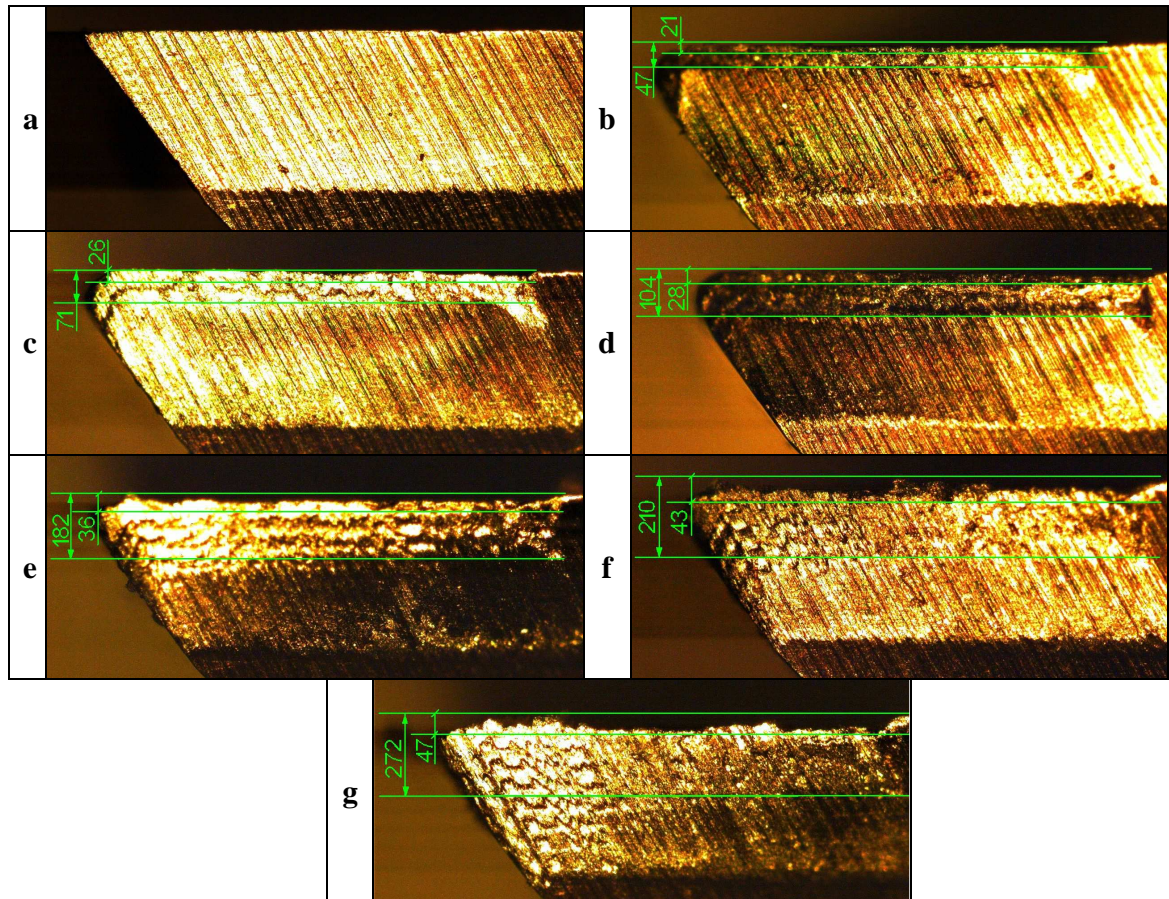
MTE 9mm end mill tooth # 1 linear toolpath clearance face wear a) Fresh tool, b-g) After pass 1-6 (each 162 mm length, 9 mm width, 1 mm depth).
